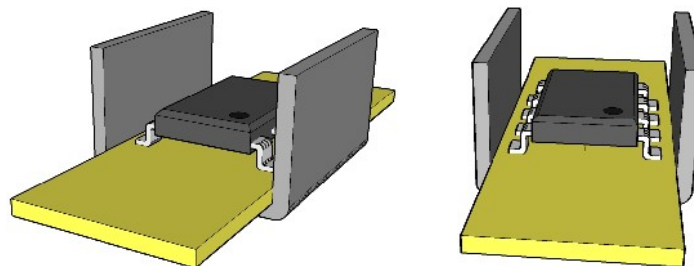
Typical current sensing application based on a current conductor (rectangular busbar), an U-shape magnetic shield and a magnetic field sensor. (The PCB with slit holes is not shown.)
